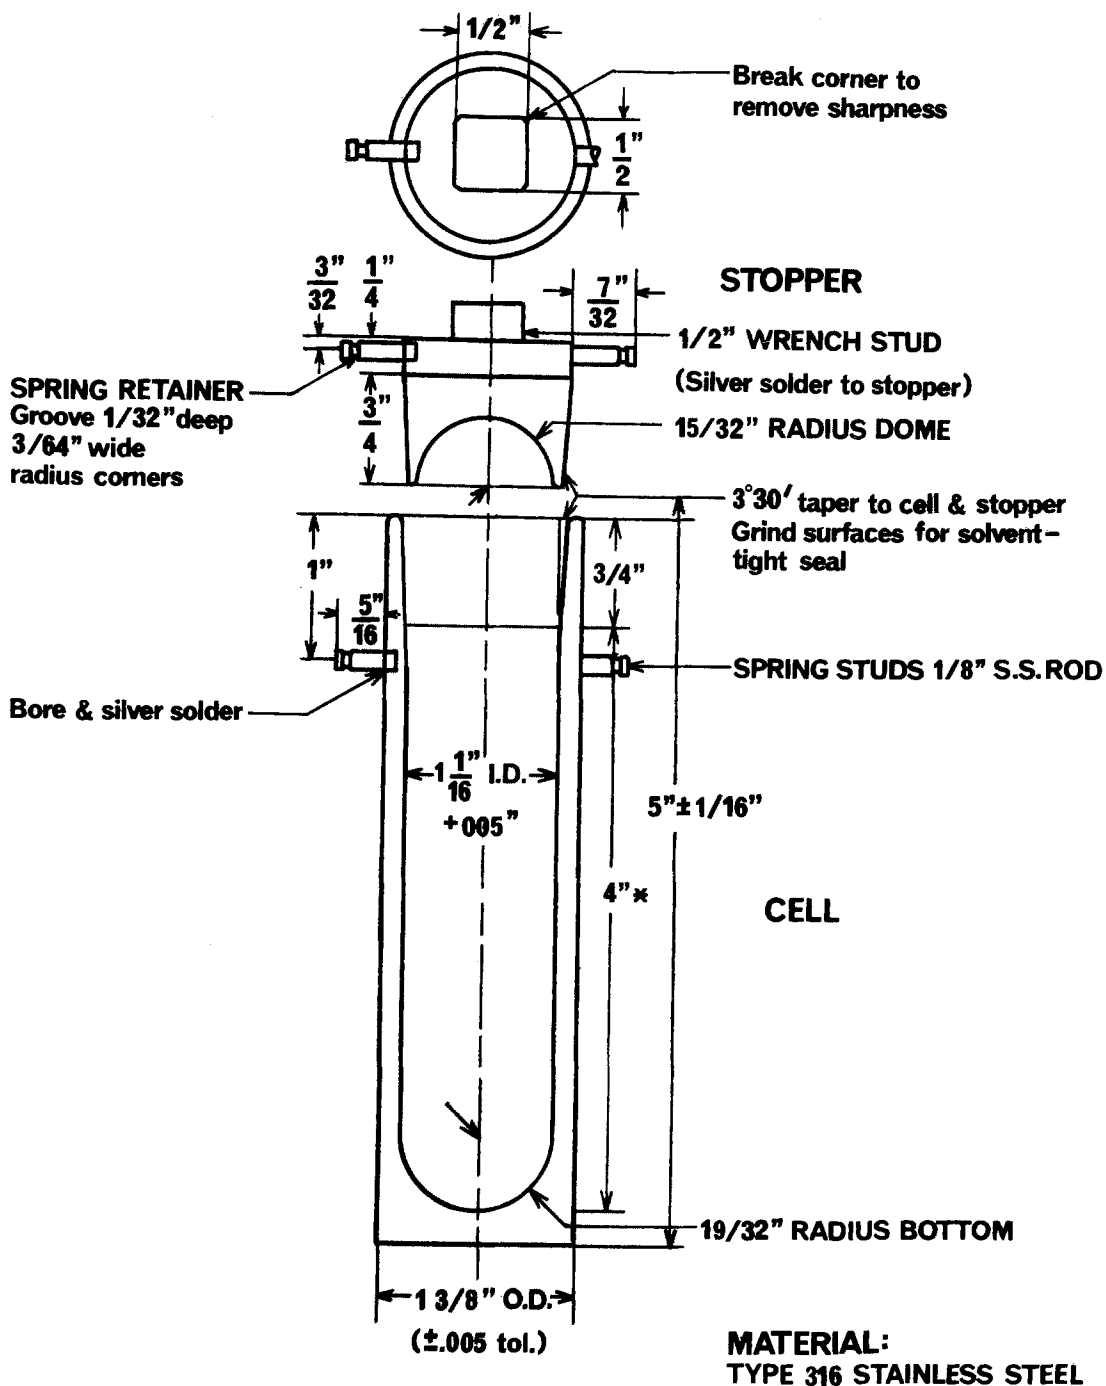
Schematic drawing of stainless steel tube and stopper.
